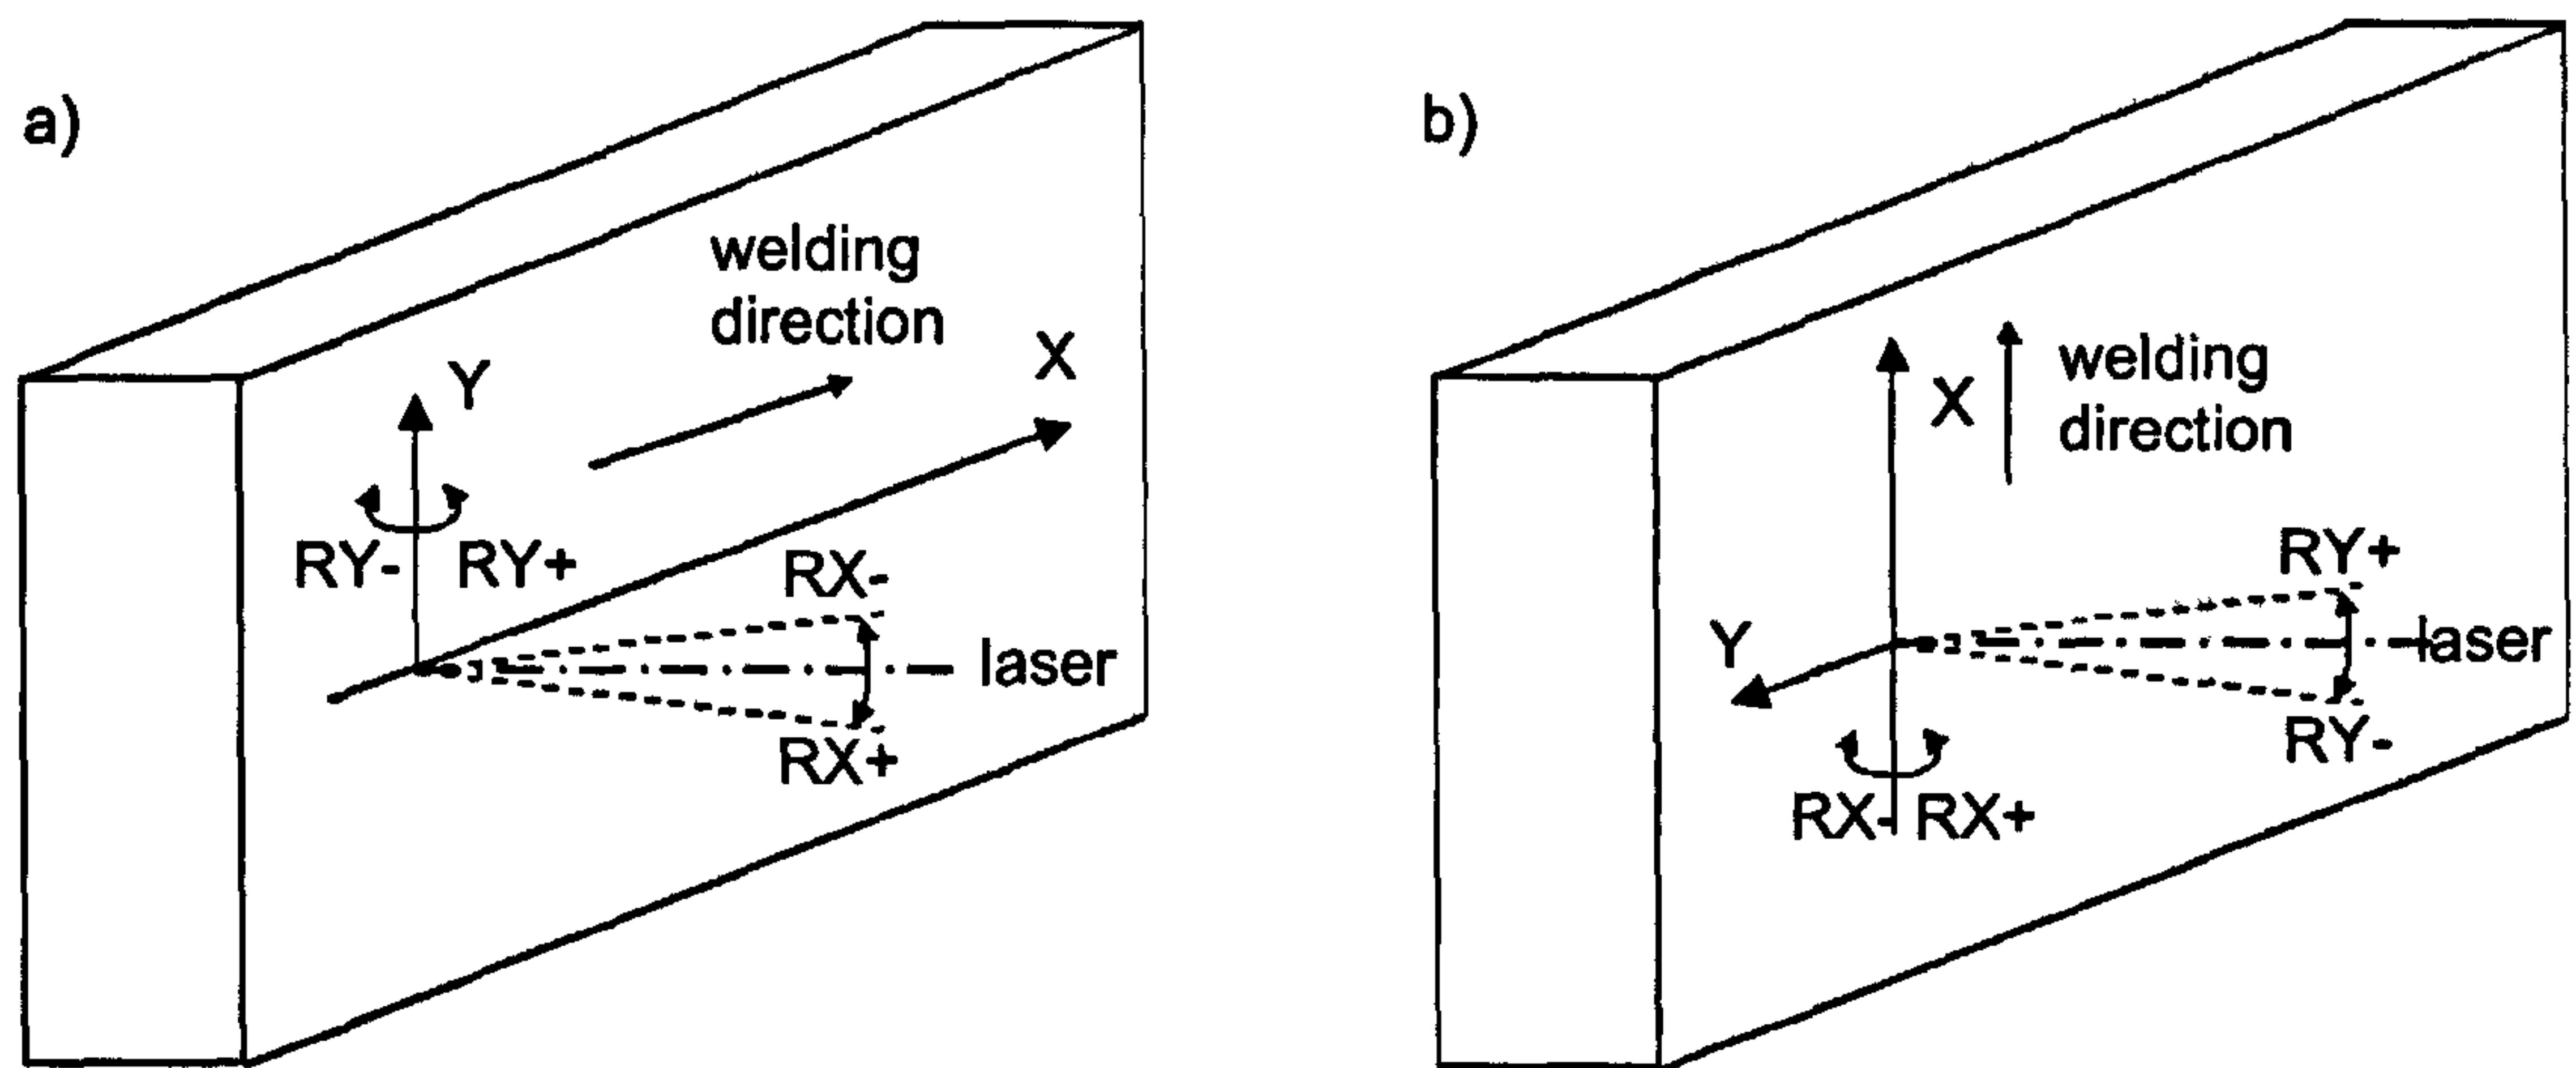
Out-of-position welding with possible orientations of the processing head:
